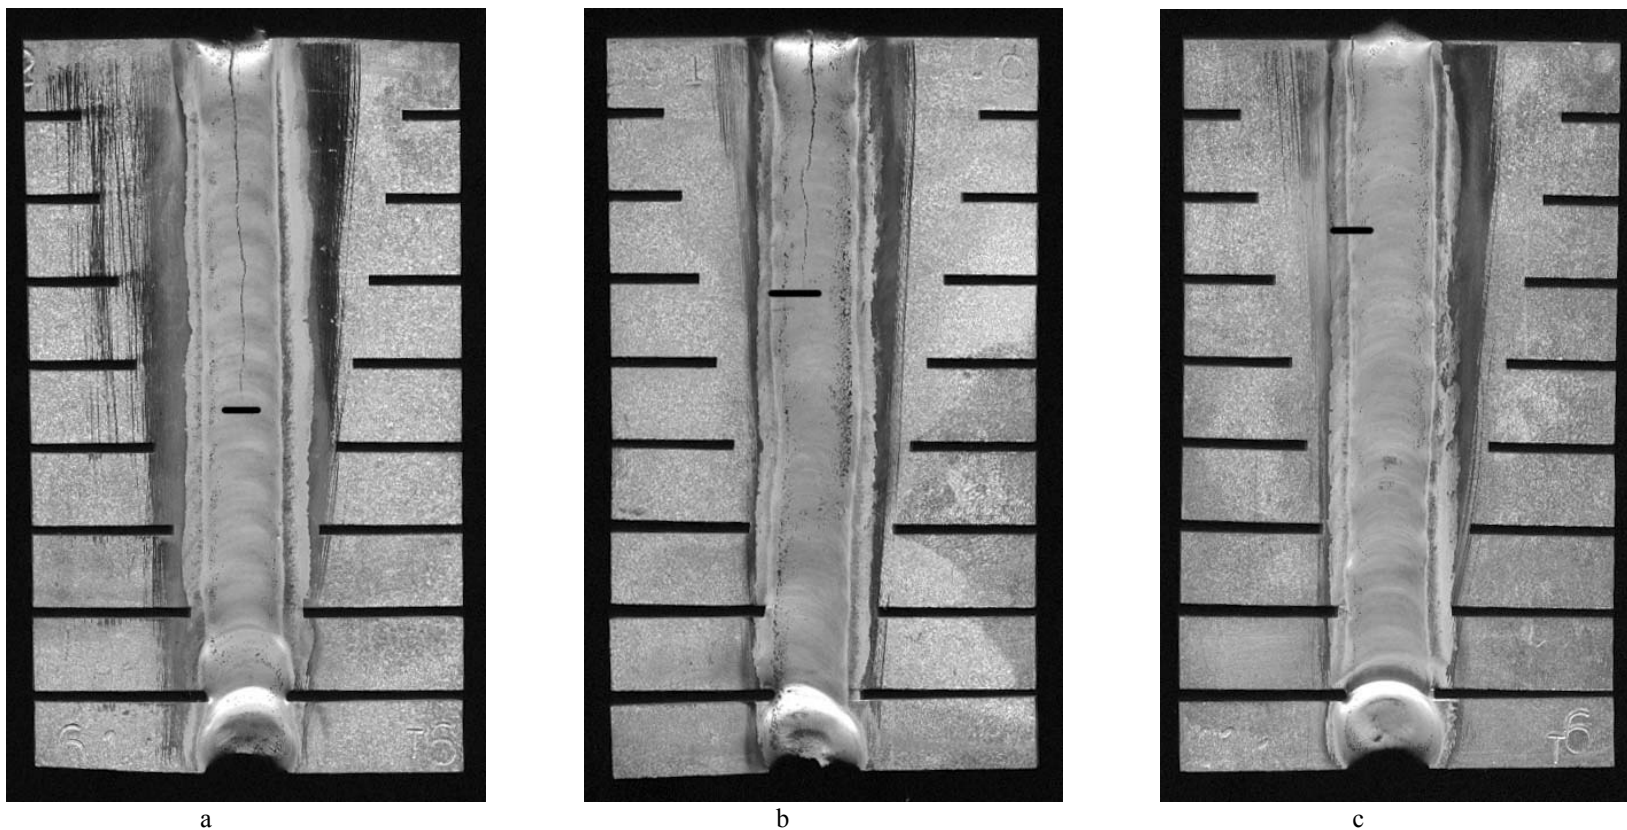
Nature of cracking of welds on Houldcroft samples in arc welding of the following test alloys, using fillers:
